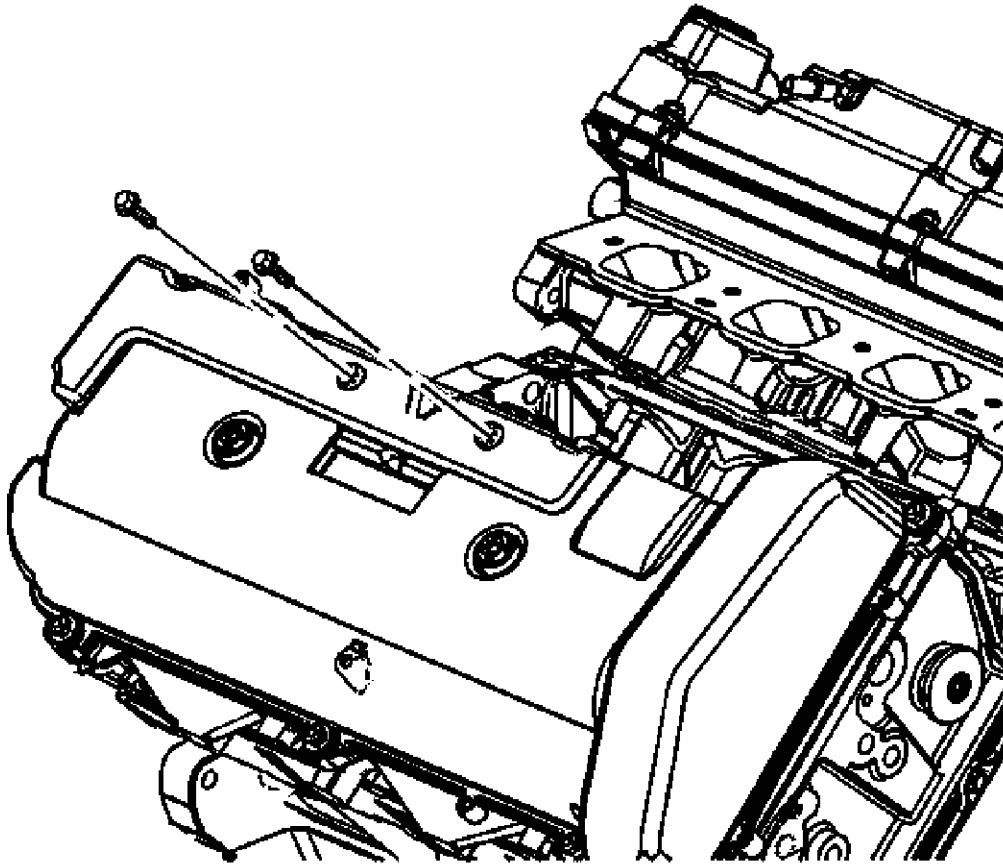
Identifying Fuel Injector Sight Shield Bracket
